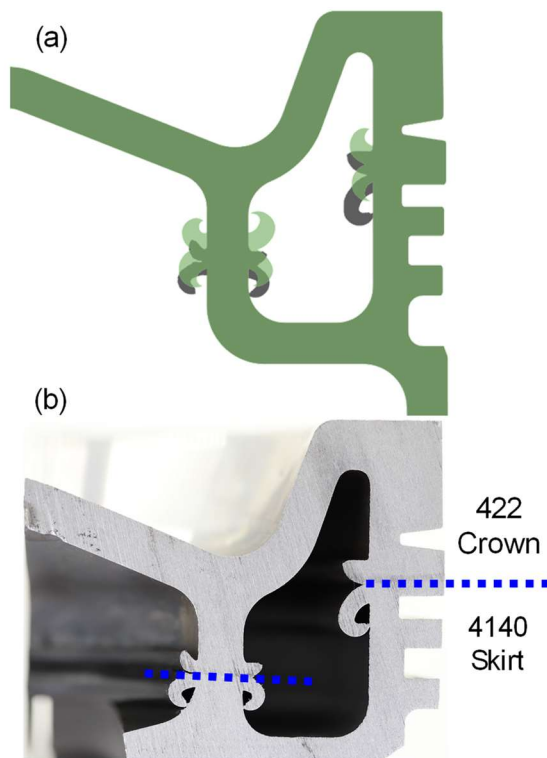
(a) Overlay of 4140 (green) and 422 (gray) piston sections (b) 422 piston cross-section with weld interface shown blue dotted line
